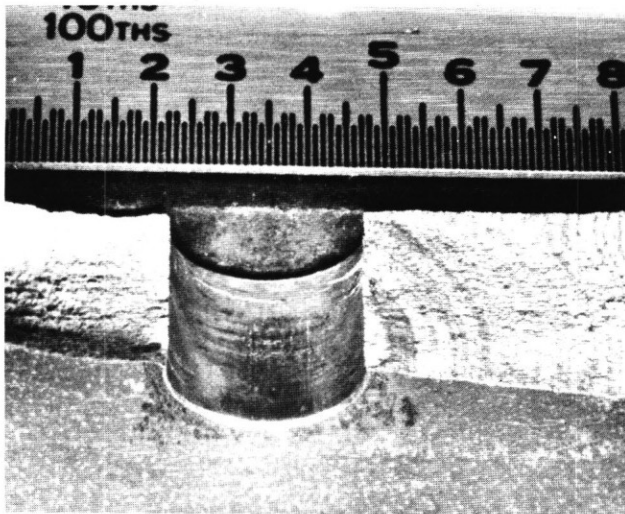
Fracture Surface of a Typical Test Specimen
